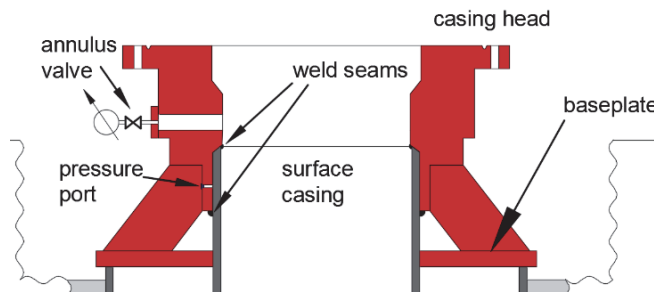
RUN OF THE SURFACE CASING AND CASING HEAD
